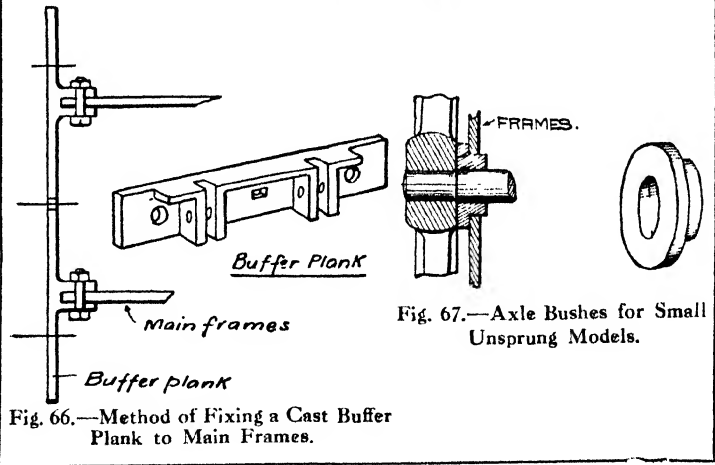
Method of Fixing a Cast Buffer Plank to Main Frames.
